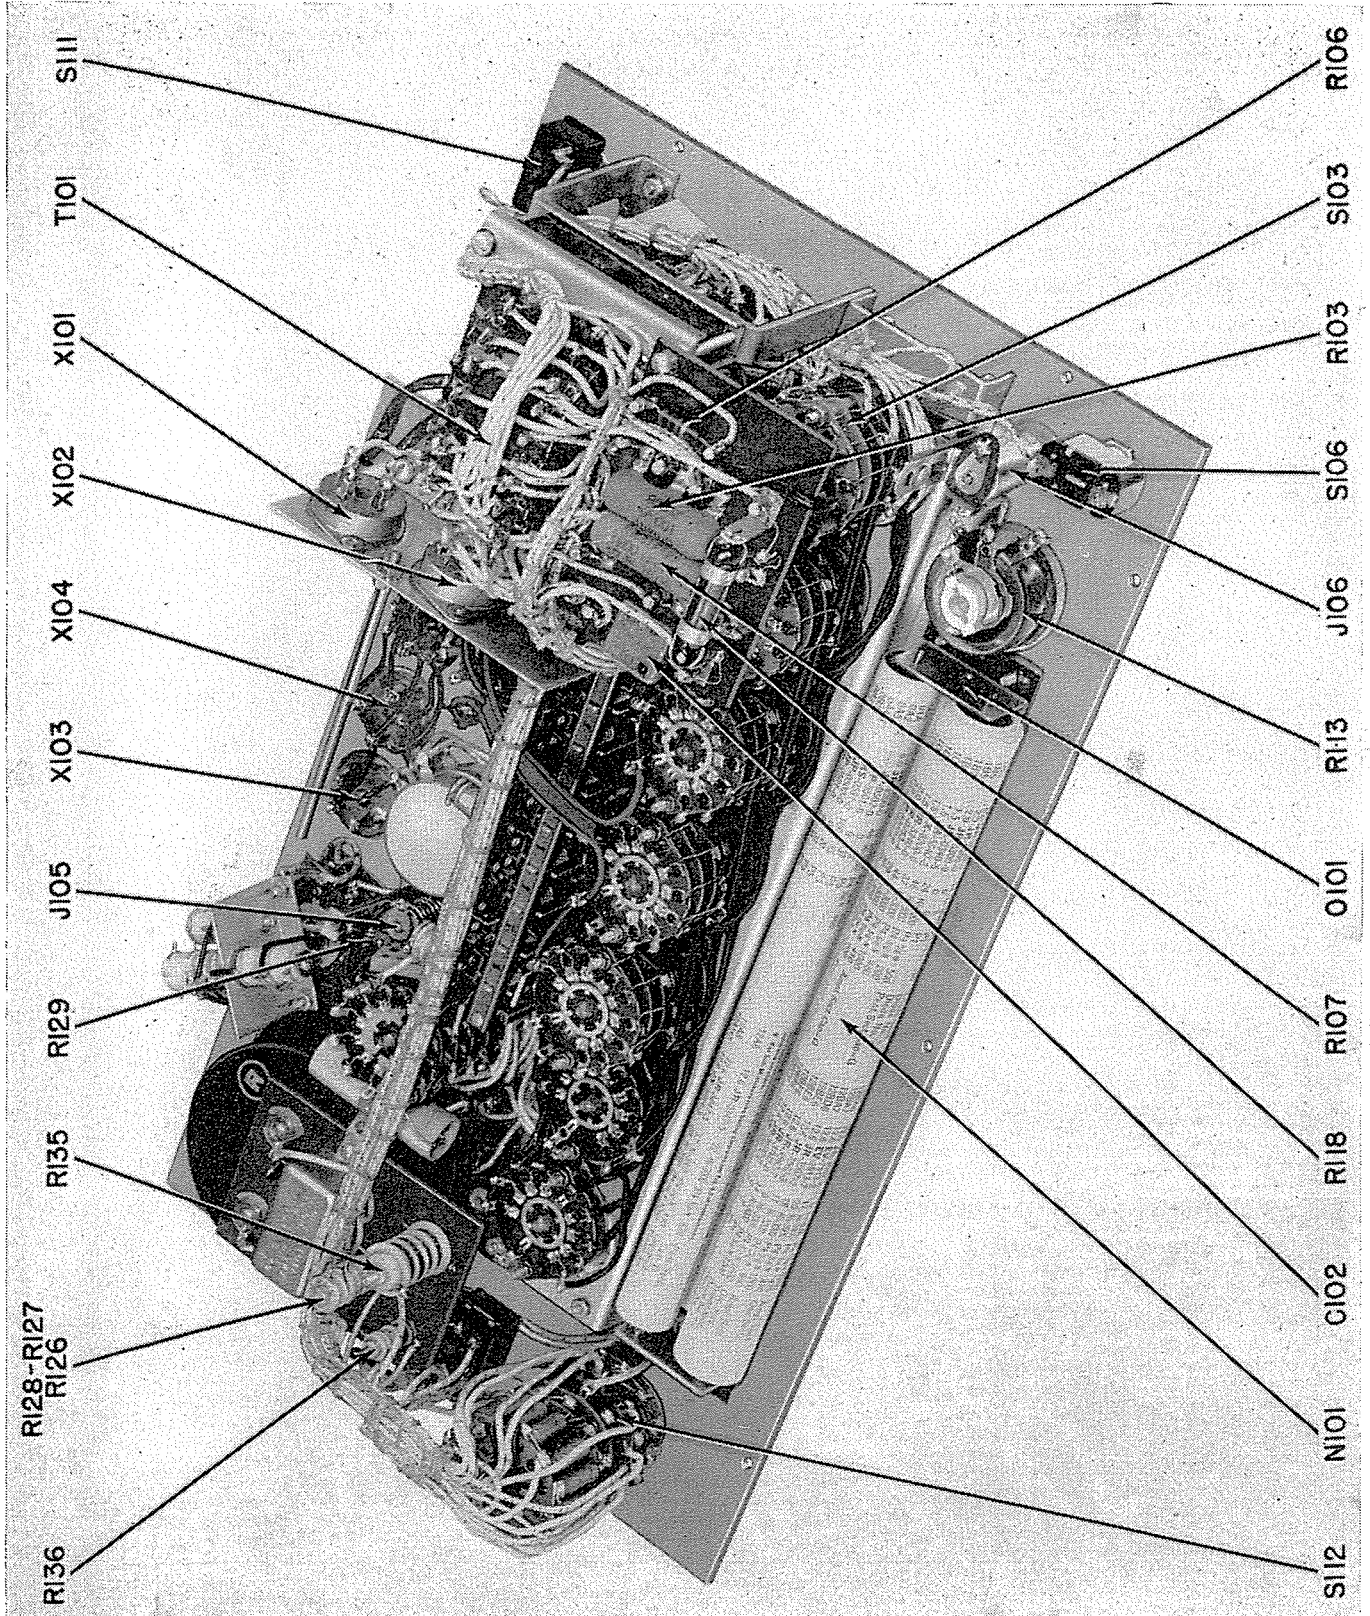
Internal View of Tube Tester TV-3A/U (Front Right Oblique)
